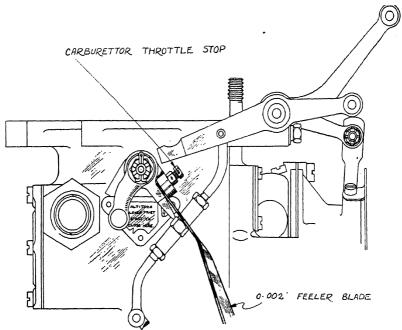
Before undertaking adjustment of slow running stop, check that throttle SPINDLE LEVER IS ACTUALLY IN CONTACT WITH STOP BY MEANS OF 0.002 IN. FEELER GAUGE.
